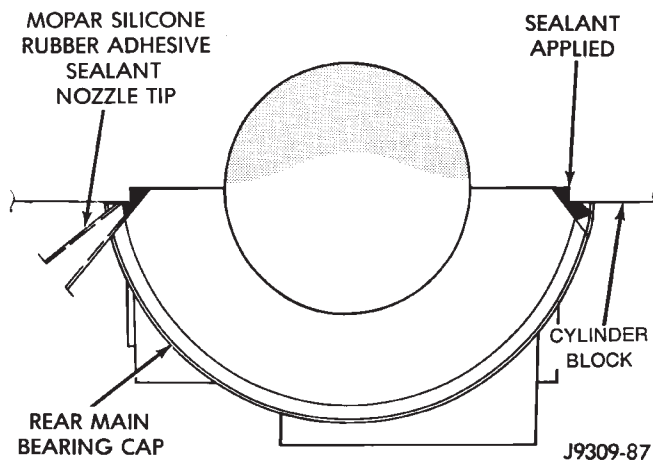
Apply Sealant to Bearing Cap to Block Joint
